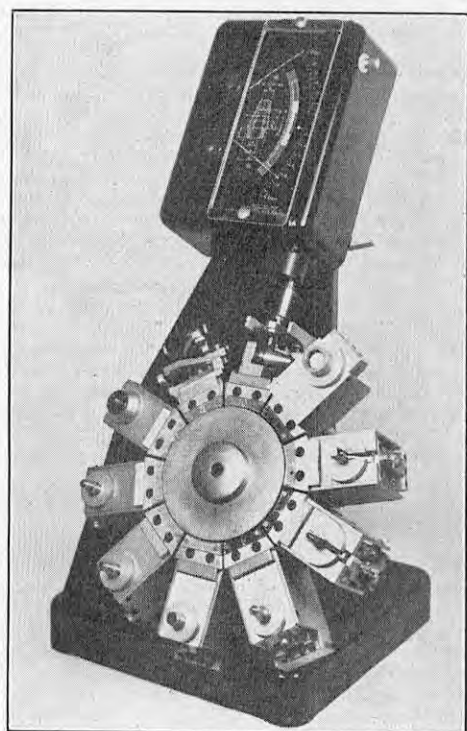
TURRET COMPARATOR FOR TEN DIMENSIONS.
